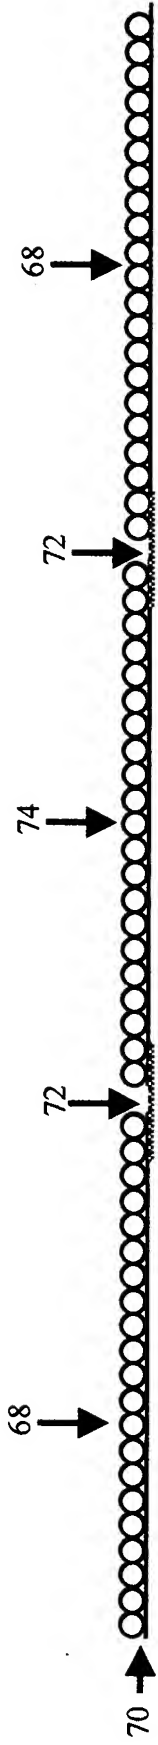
Unfolded Cross Sectional View Of End Panels And Bottom Panel
